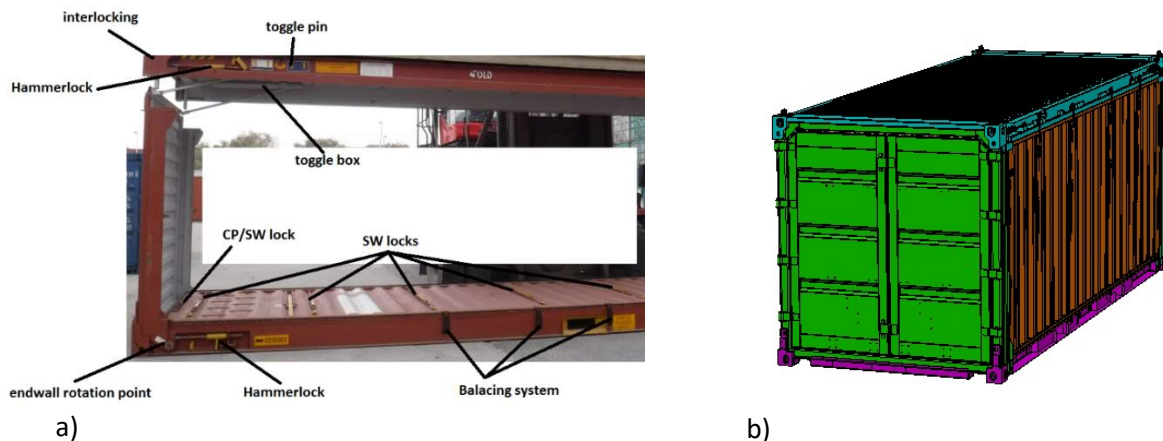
a) The auxiliary components for folding; b) detailed design showing the sub-assemblies and auxiliary parts
